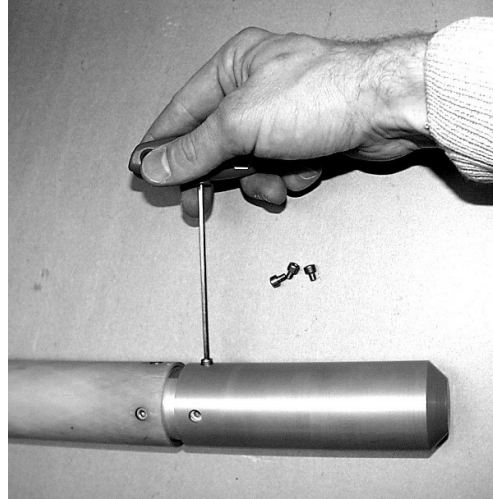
Mounting bottom plug on ON-OFF switch.
